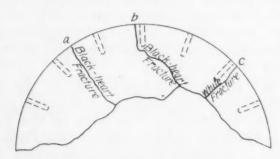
Sketch Of Blower Fan Casting Showing The Type Of Eracture Which Resulted From The Several Treatments Given This Casting As Described In Text.
